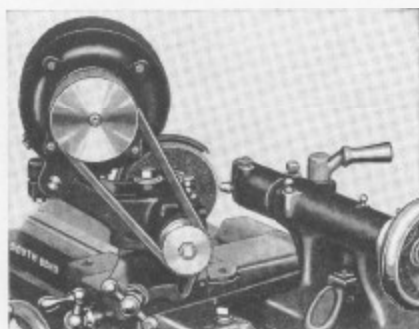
Truing a Grinding Wheel Using Tailstock Diamond Holding Fixture.
